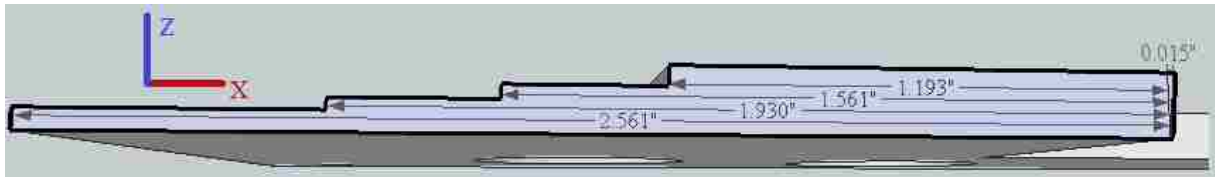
Cross sectional view of the 10x10 cm² upper trimmer lead plate in the cross-plane dimension illustrating the lateral dimensions of the plate.
